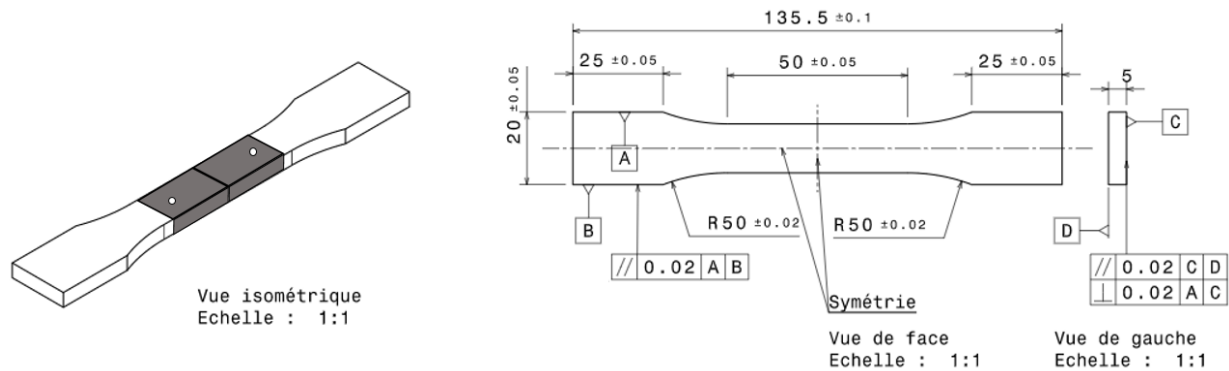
Drawing of the constant section tensile specimen (in mm).
